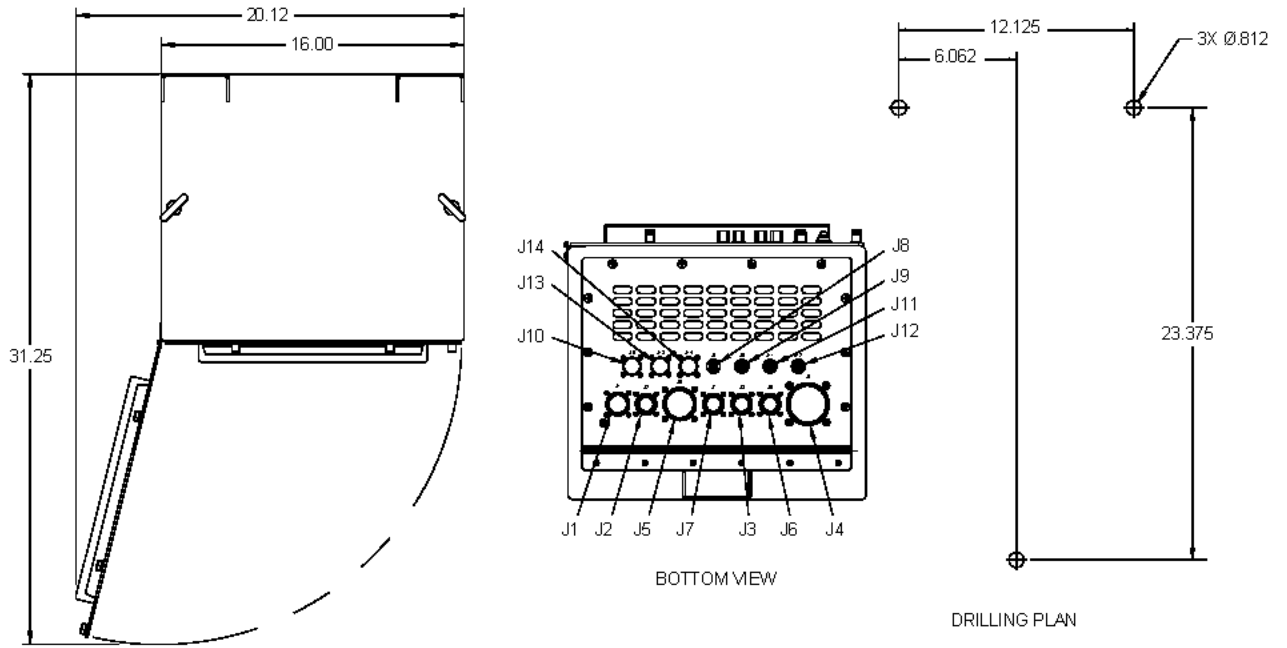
Unit 1 or 6 Rodmeter and Unit 2 or 7 Sea Valve Installation (Sheet 3)
